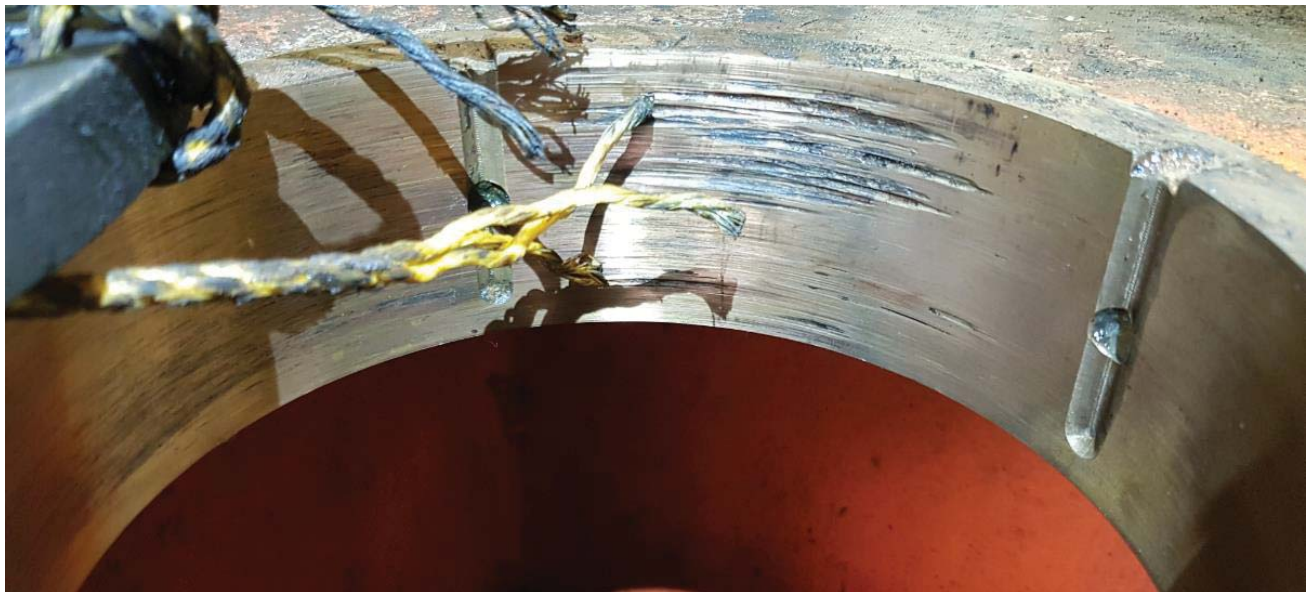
Head Cover, Upper Gate Stem Bushing
